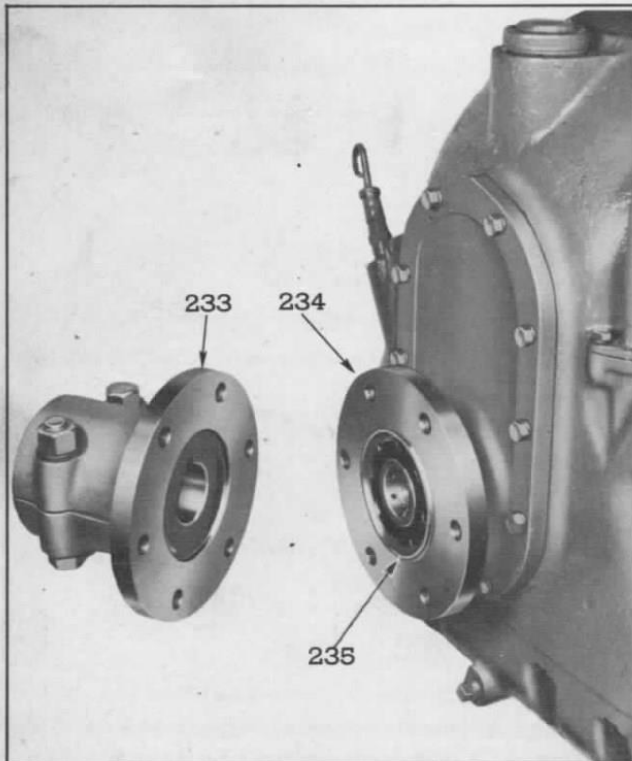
Engine Shaft and Propeller Shaft Couplings
